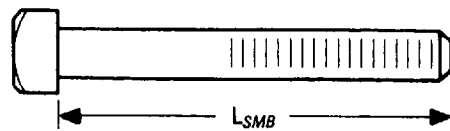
SPECIFIED MACHINE BOLT LENGTH
